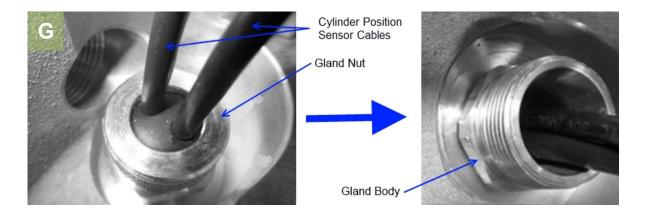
Remove Gland Nut and Cylinder Position Sensor Cable Bushing
